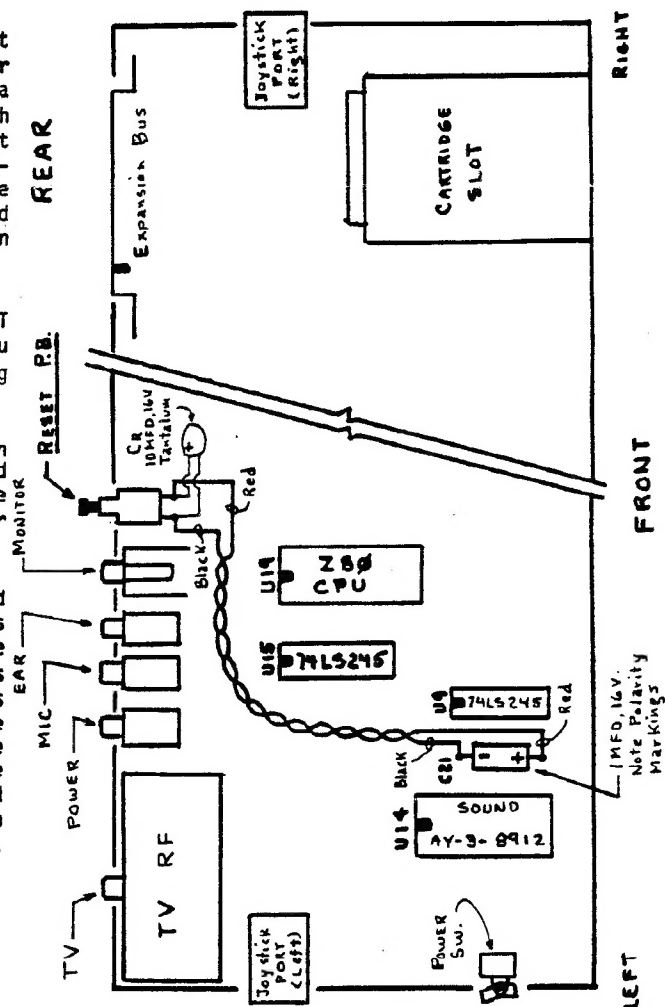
2068 COMPONENT LAYOUT, TOP VIEW
